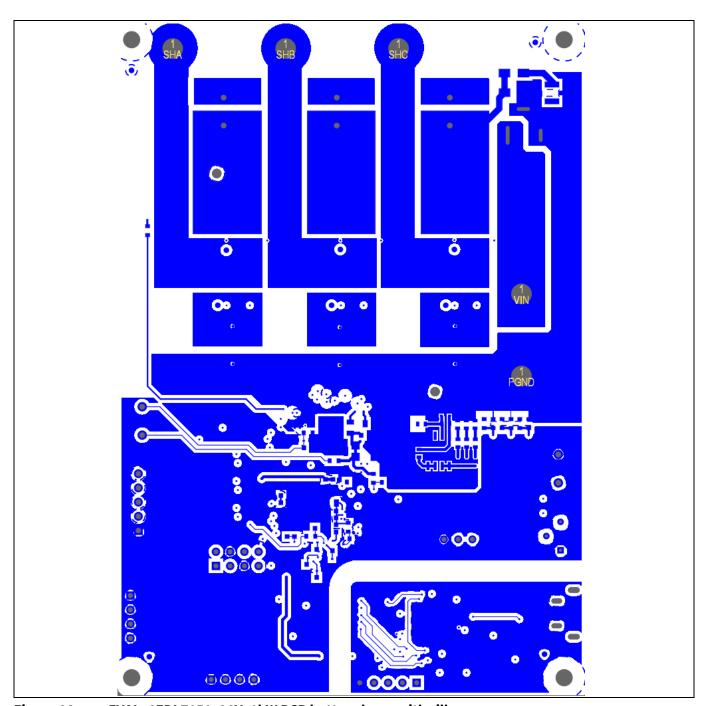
EVAL_6EDL7151_36V_1kW PCB bottom layer with silkscreen
